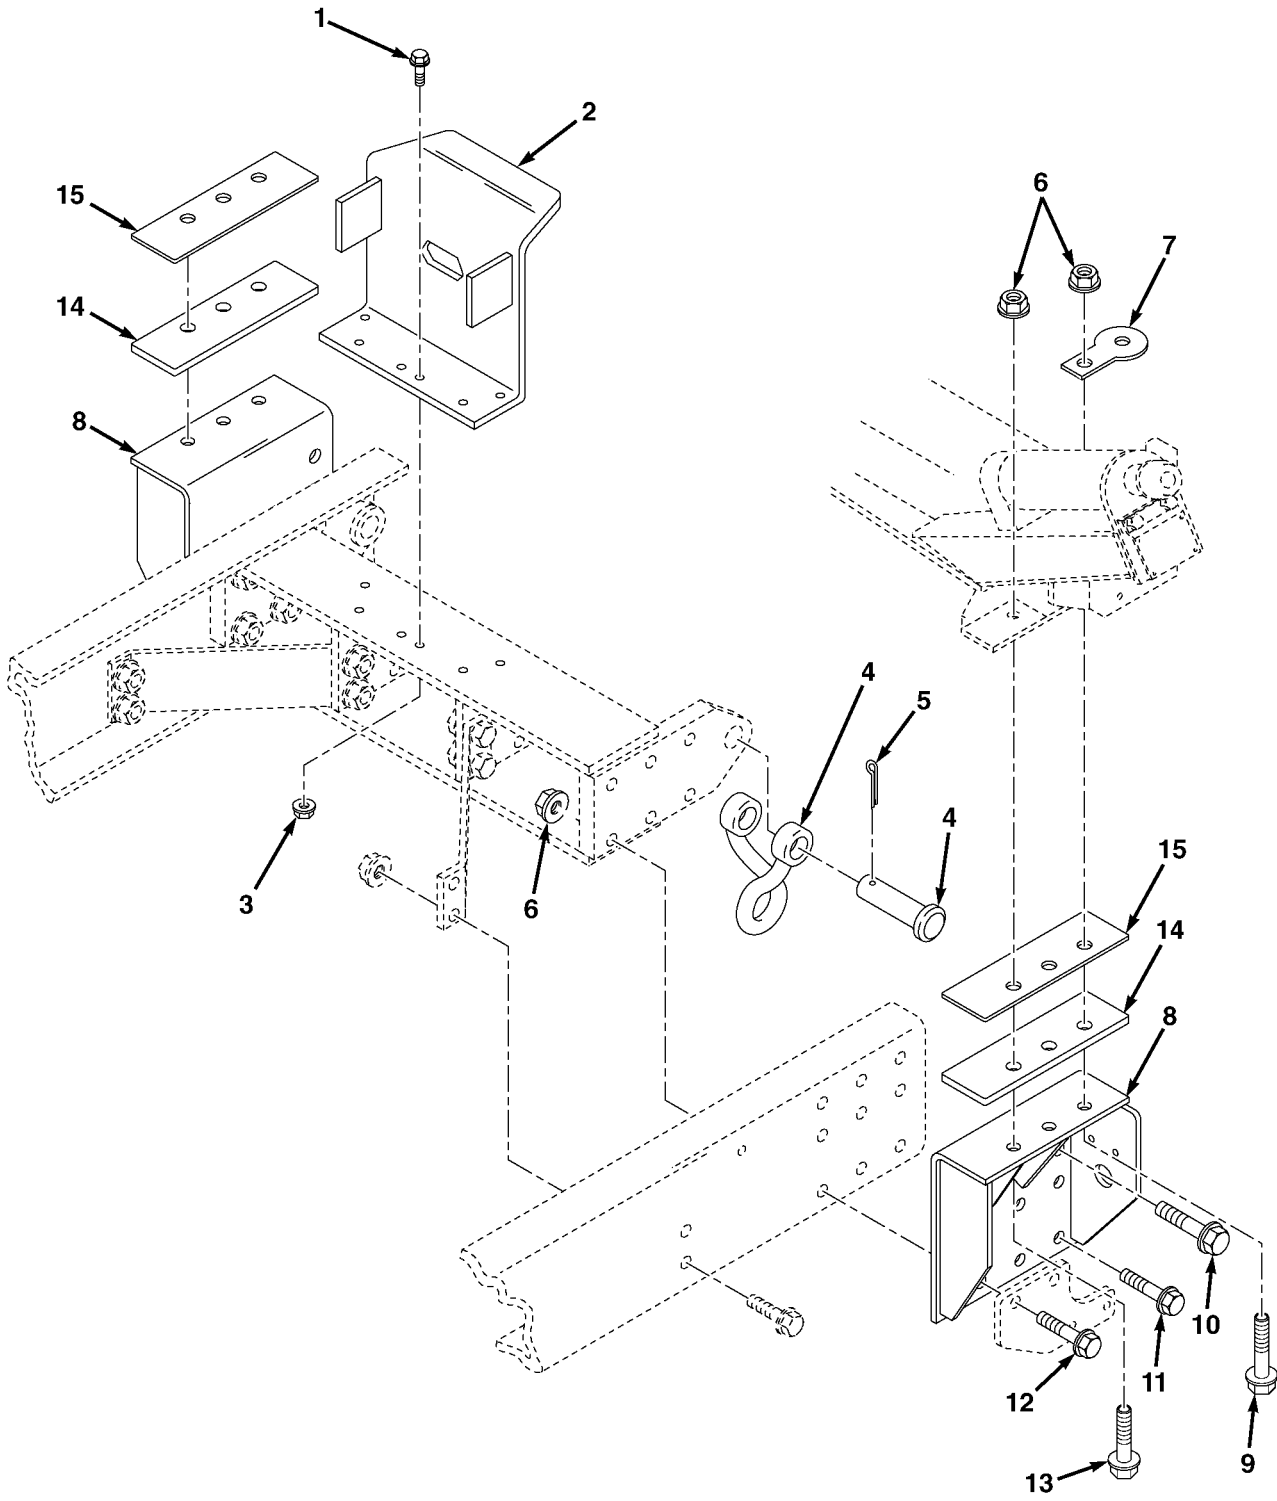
REAR ROLLER MOUNTING ASSEMBLY
